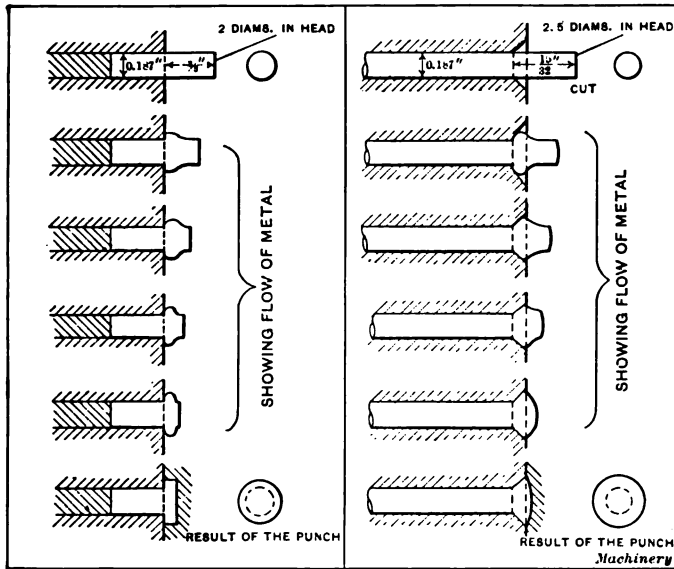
Evolution of Screw Blanks made on Single-stroke Cold-headers
